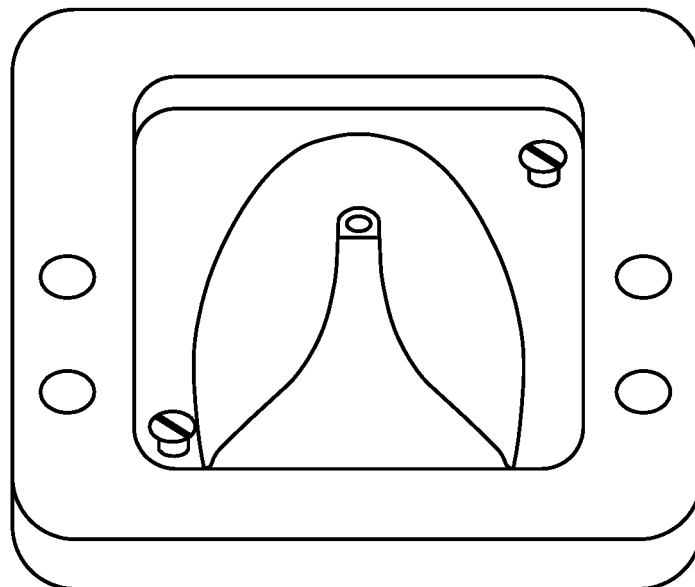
Metal mounting tray with heel in position before addition of molten alloy
